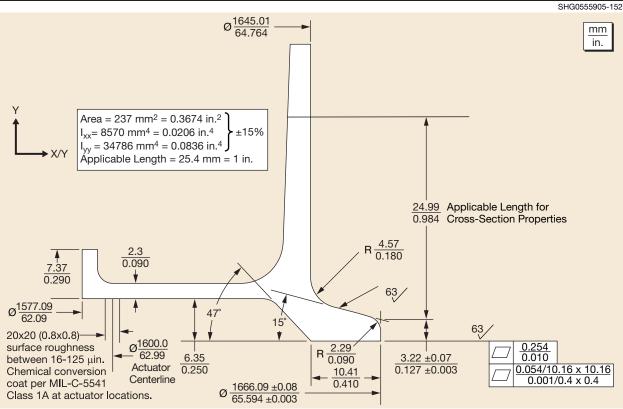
Dimensional Constraints on Spacecraft Interface to 1666-5 PAF
